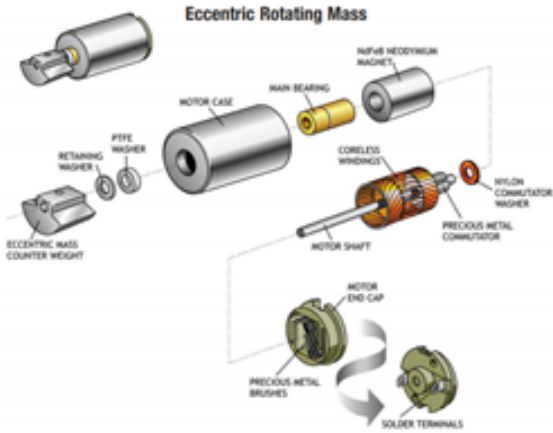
Exploded view of eccentric rotating mass actuator [6].
